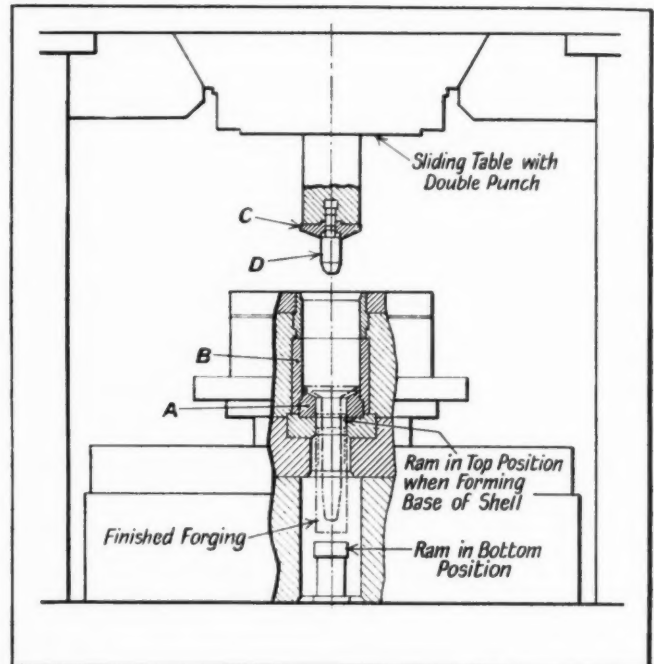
Arrangement of Tool Equipment Used on Press for Extrusion Operation
